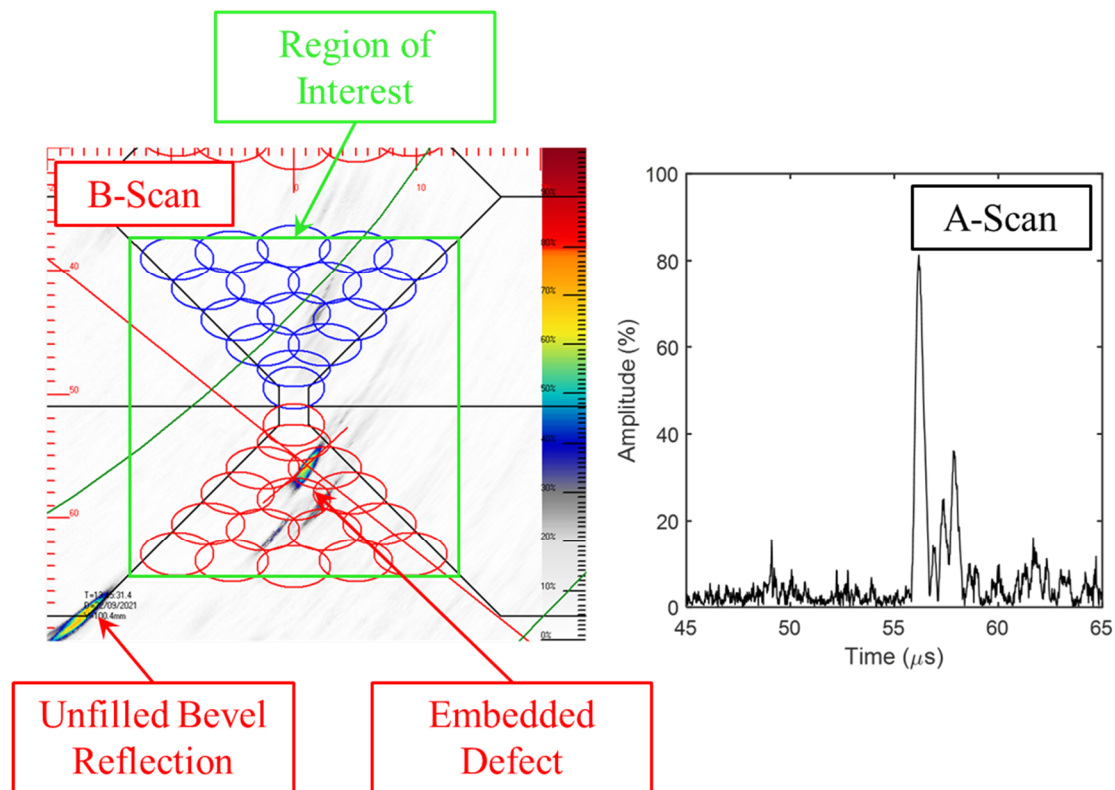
In-process UT inspection of a partially filled multi-pass weld showing correct detection of an intentionally embedded tungsten defect inserted in layer 3 (Defect 2)
